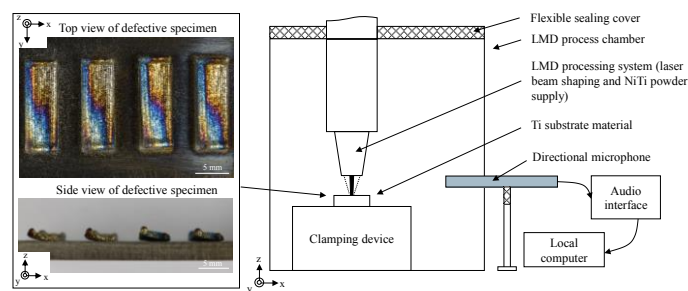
Welding samples with bonding (l.) defects and schematic drawing of experimental LMD and monitoring setup (r.)
